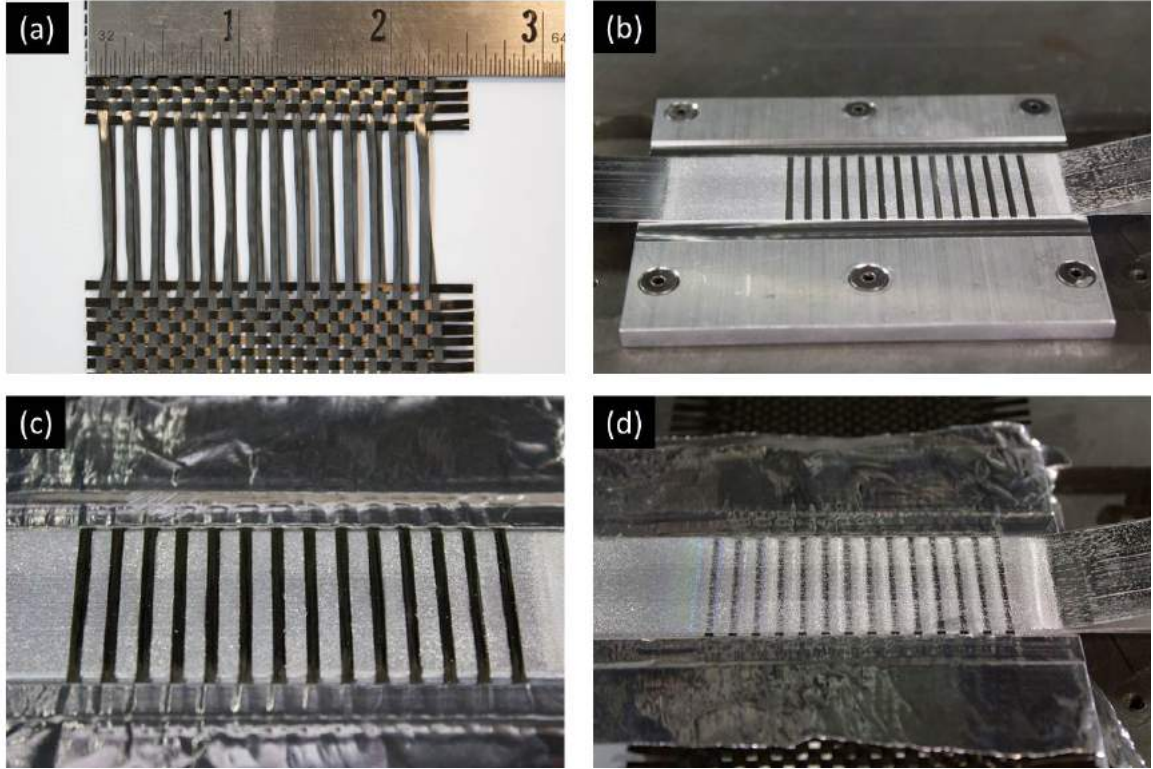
(a) CF textile preparation with horizontal fibers removed in the weld region. (b) Channels cut to house the CF bundles. (c) CF bundles secured in place prior to welding. (d) First layer of aluminum tape welded over CF textile.
